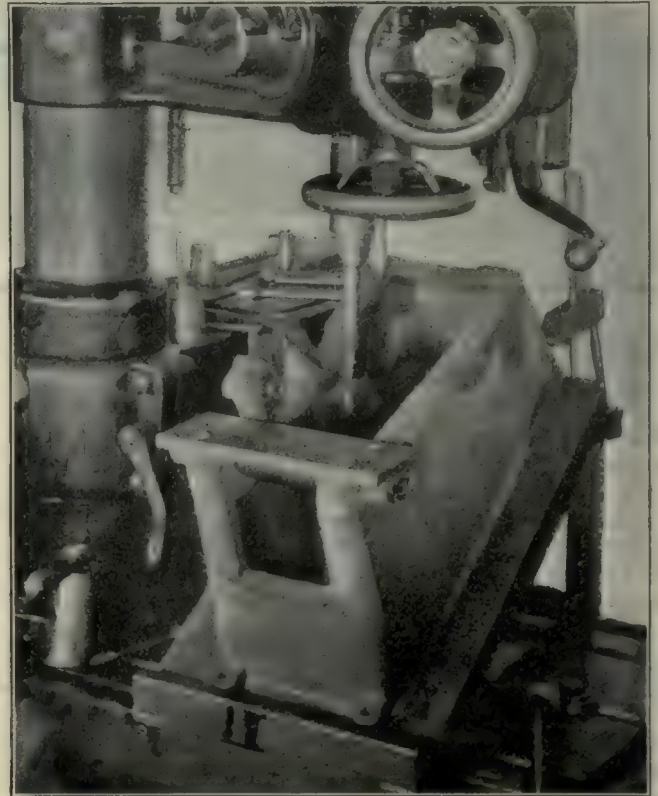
DRILL JIG LOCATED BY BABBITTED BEARINGS
